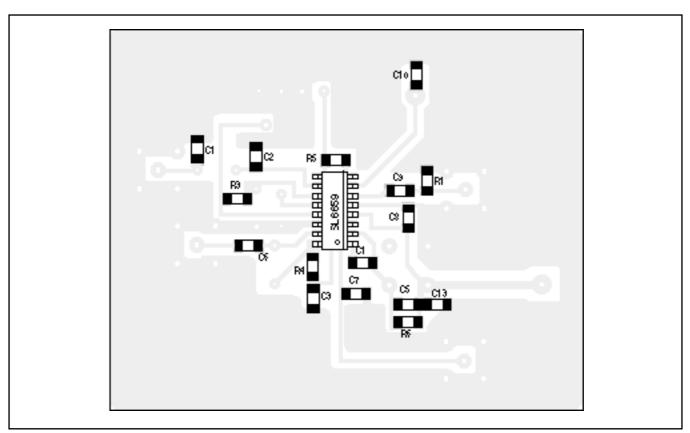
Demonstration board surface mount component overlay (track side). Scale = 2:1.
